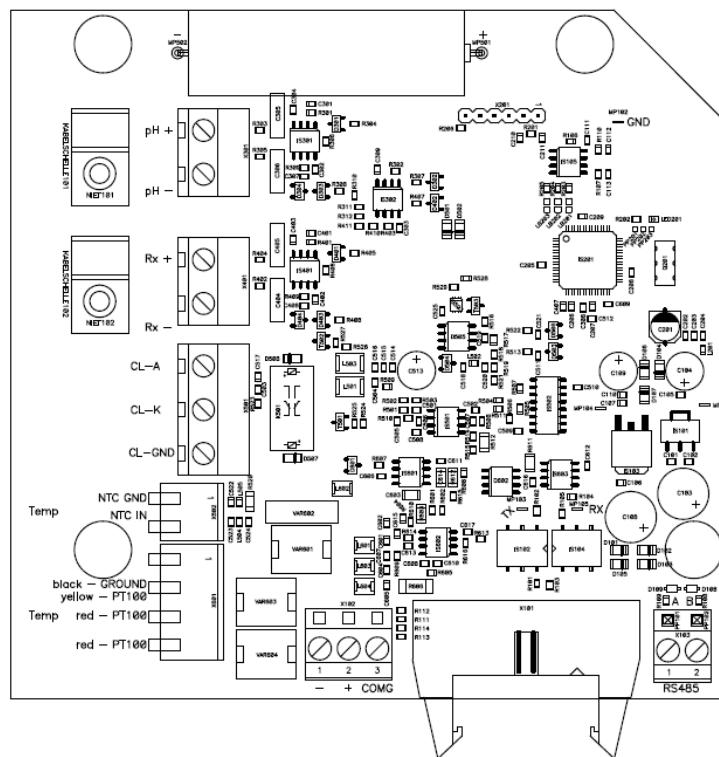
Sensors Card Drawing (pH-ORP-AMP-Tempr.Card)
